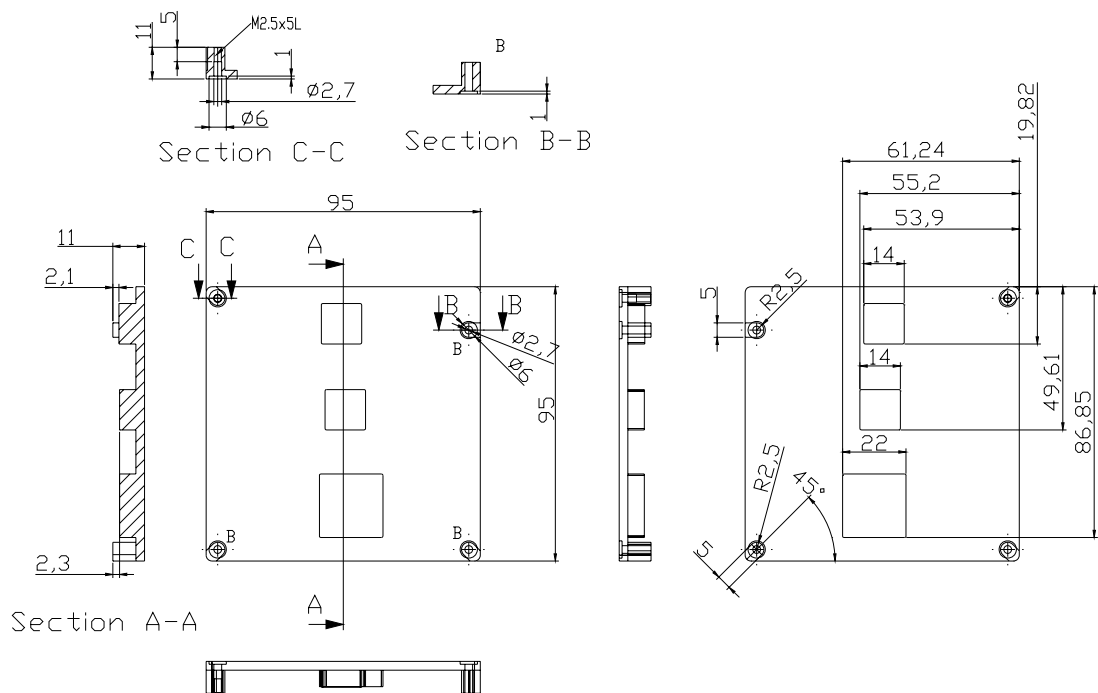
Drawing of Heatspreader for BGA type CPU
